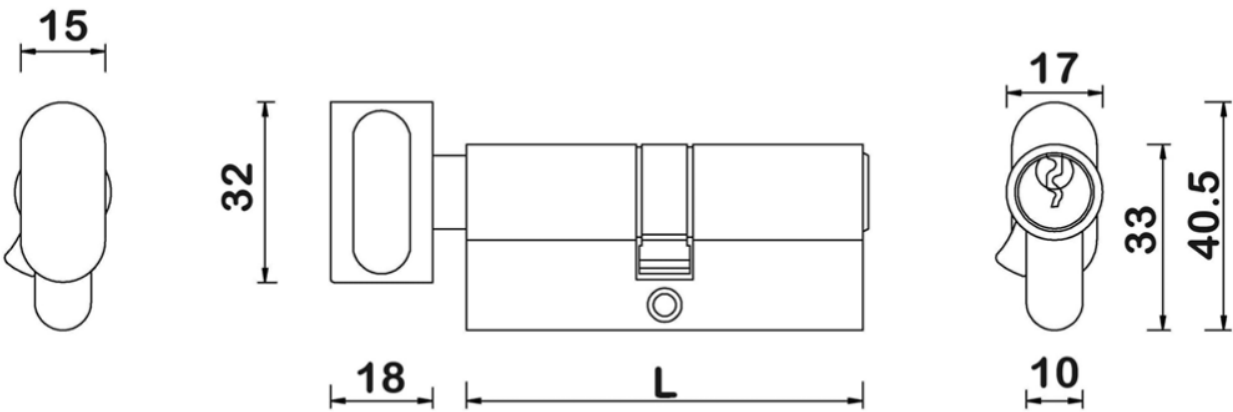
Item 16 – Consort CH 783.2.SNP Cylinder Drawing
